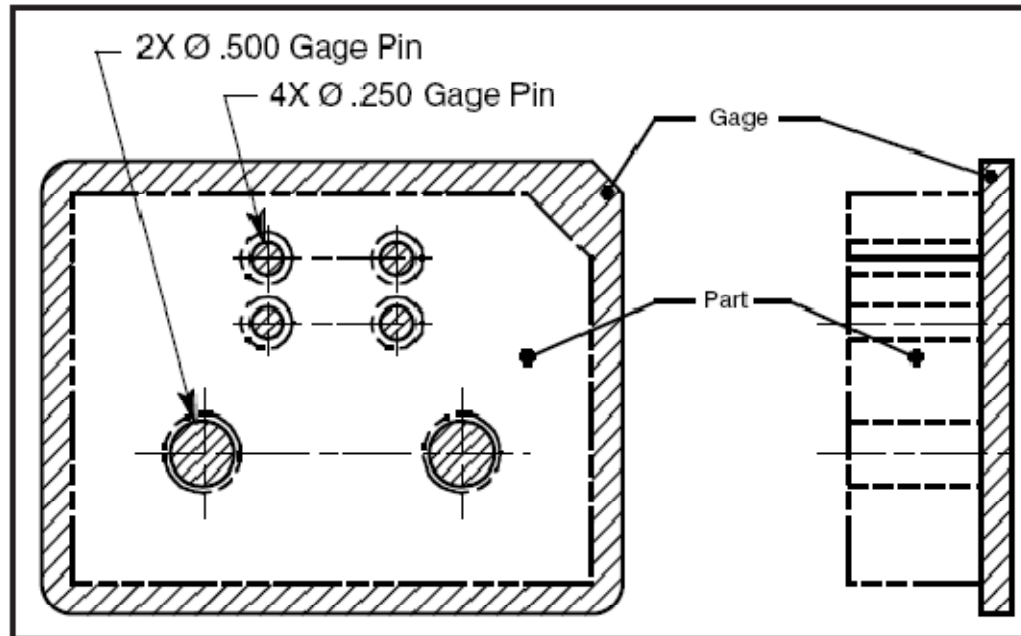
A gage locating the four-hole pattern to the two-hole pattern, datum D.
